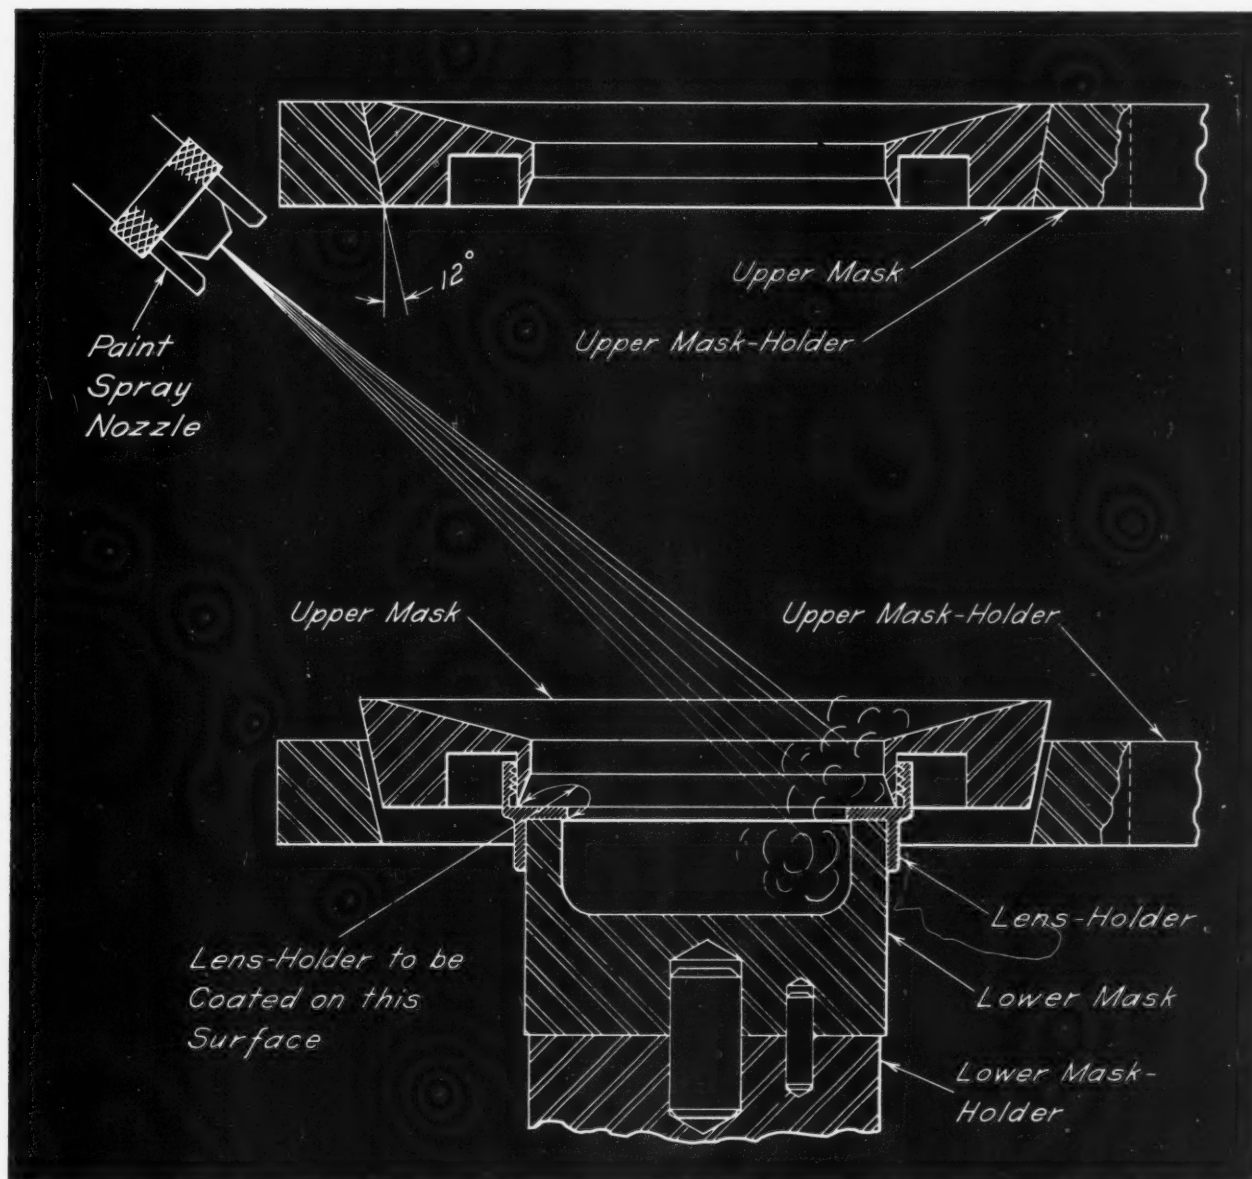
(Upper View) Upper mask, shown at top of Fig. 2, assembled in holder of semi-automatic spraying machine. (Lower View) Lens-holder mounted on lower mask, with upper mask in place for application of coating to the inner surface by a spray gun while work revolves
